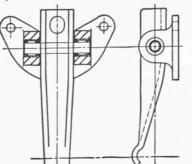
The Needle Bearings in the fingers of an automobile clutch are packed with grease before assembly. No additional lubrication is needed.
